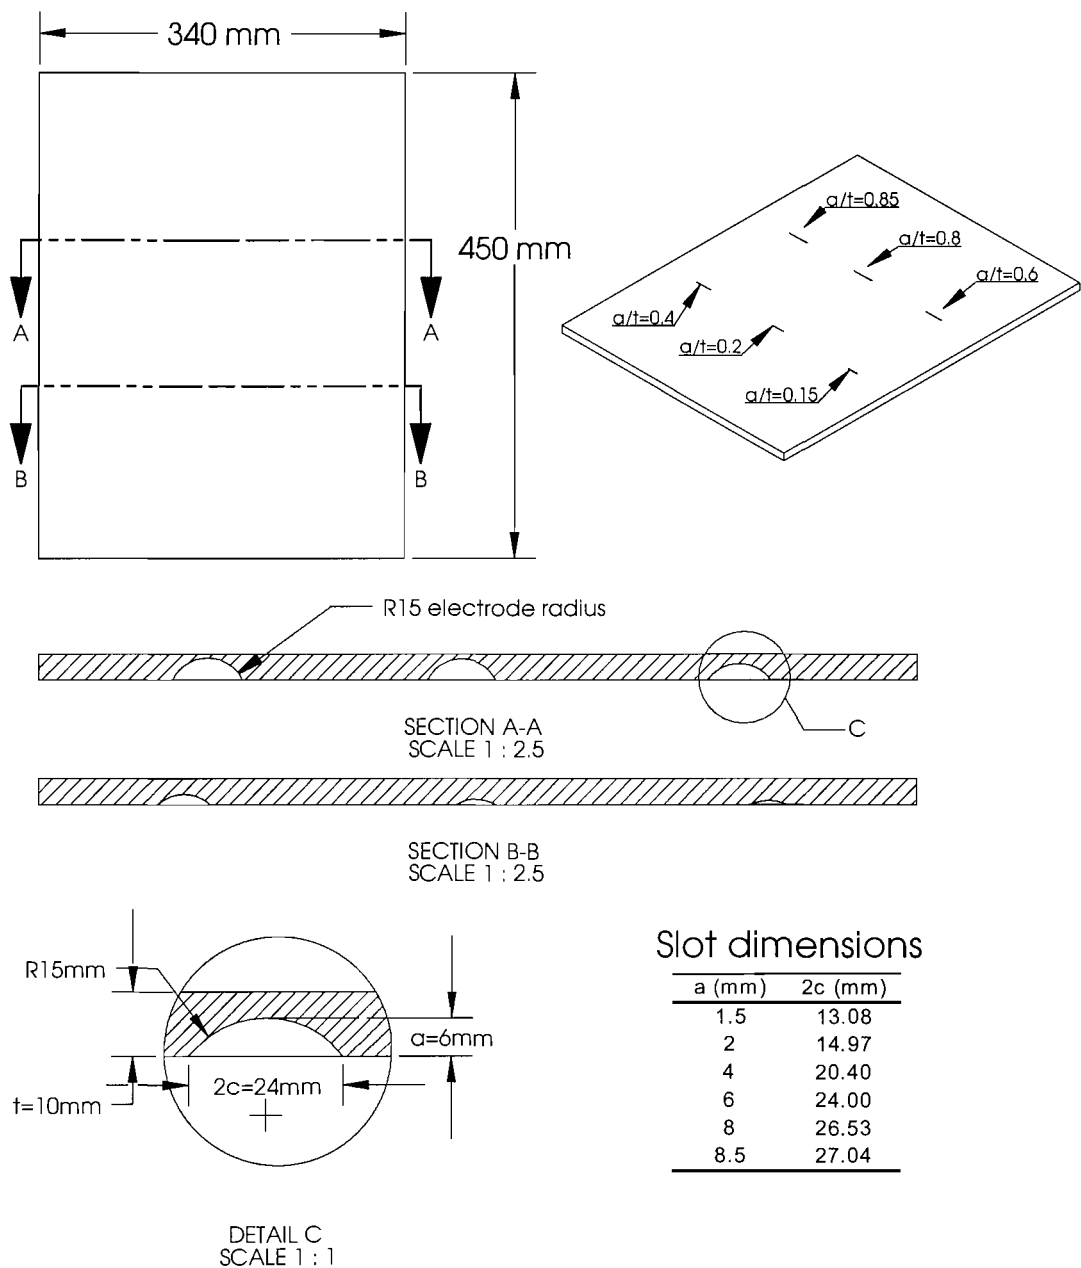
Technical drawing of the specimen. The enlarged detailed C shows a cross-sectional view of the damage at  $a/t = 0.60$
